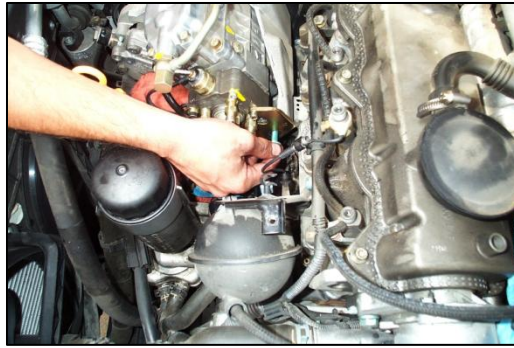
Replace the 8mm Bolt Which Holds the Lower Yellow Zinc-Plated Bracket
